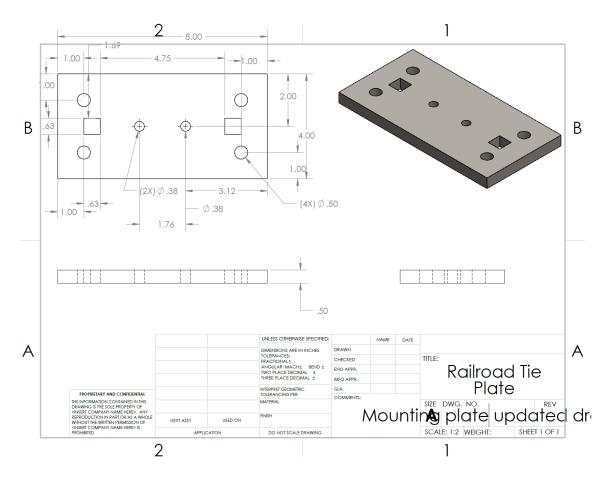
DRAWING OF THE RAIL TIE MOUNTING PLATE.
